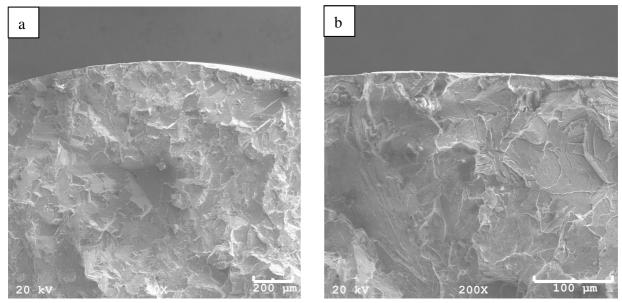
SEM photos of fracture surface of PH-42 Supra steel non-nitrided fatigue test specimen in rotating bending test: a) rupture by brittle fracture and b) detail of beginning of fatigue crack at specimen surface.
